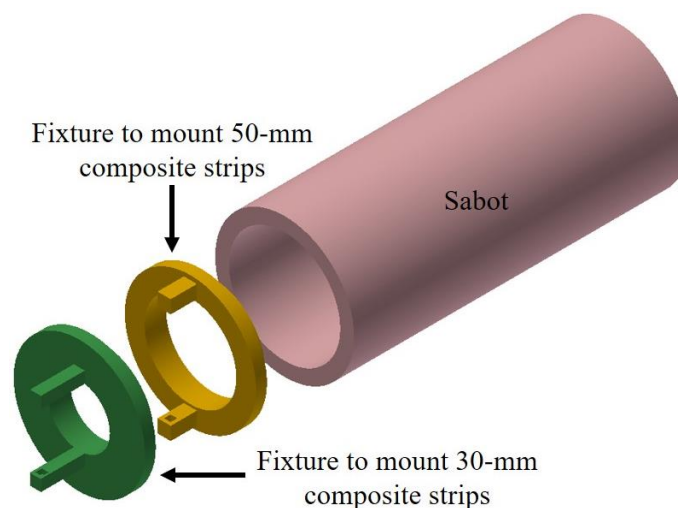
Schematic of the sabot and fixtures to mount 30-mm or 50-mm composite strips.
